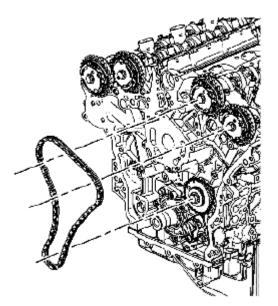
Identifying Left Bank Secondary Camshaft Drive Chain
